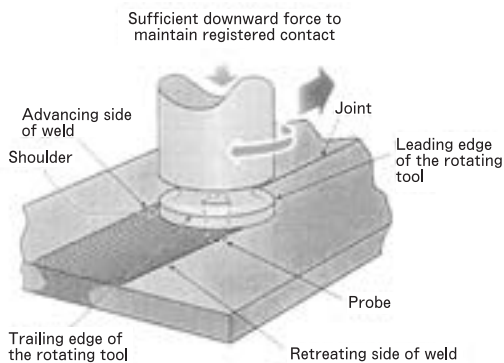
Schematic illustration of Friction Stir Welding⁵⁶⁾.
